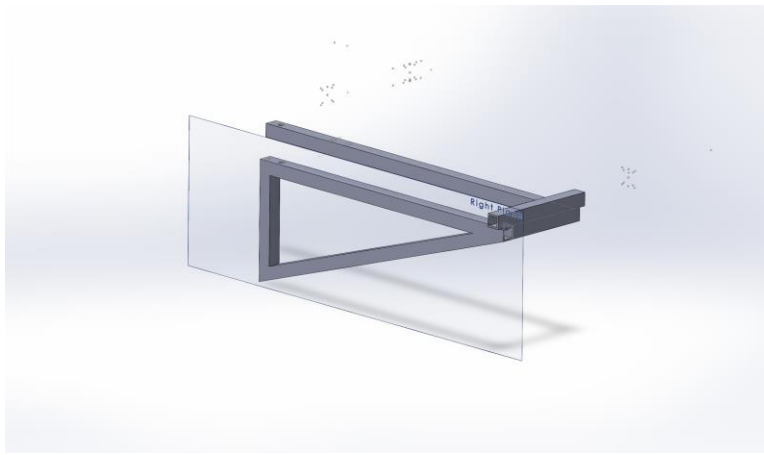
CAD model of Tool Drawer Mounting Bracket.
